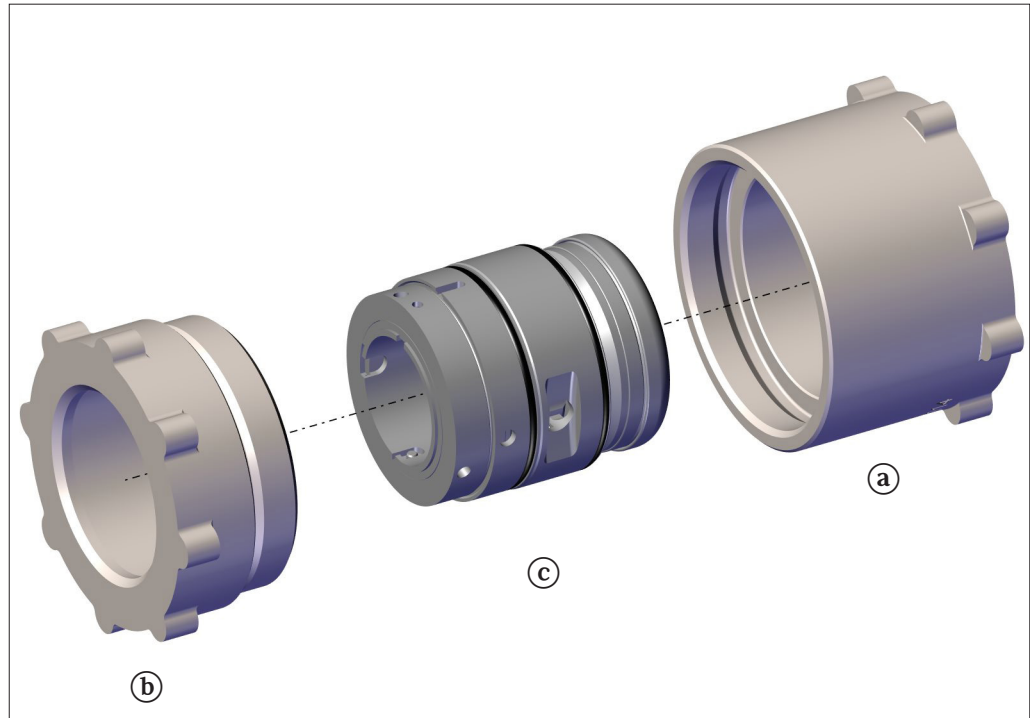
Inserting the mechanical seal cartridge correctly in the assembly aid
